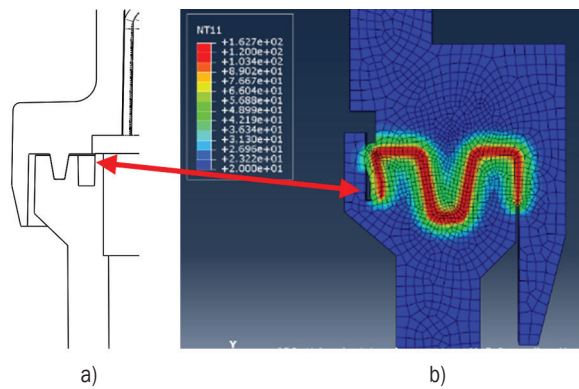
a) Developed weld joint profile design, and b) the semi-melted agglomeration status analysis of the developed weld zone [10]
